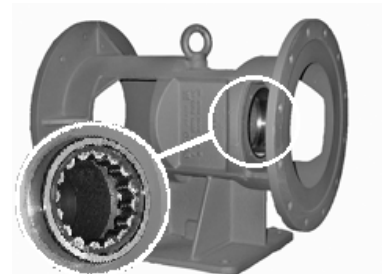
Bearing housing, outer race of cylindrical roller bearing
